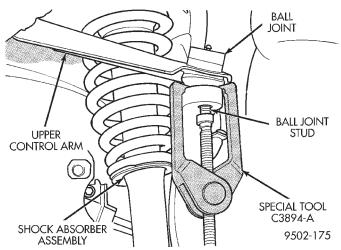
Ball Joint Stud Removal From Steering Knuckle
